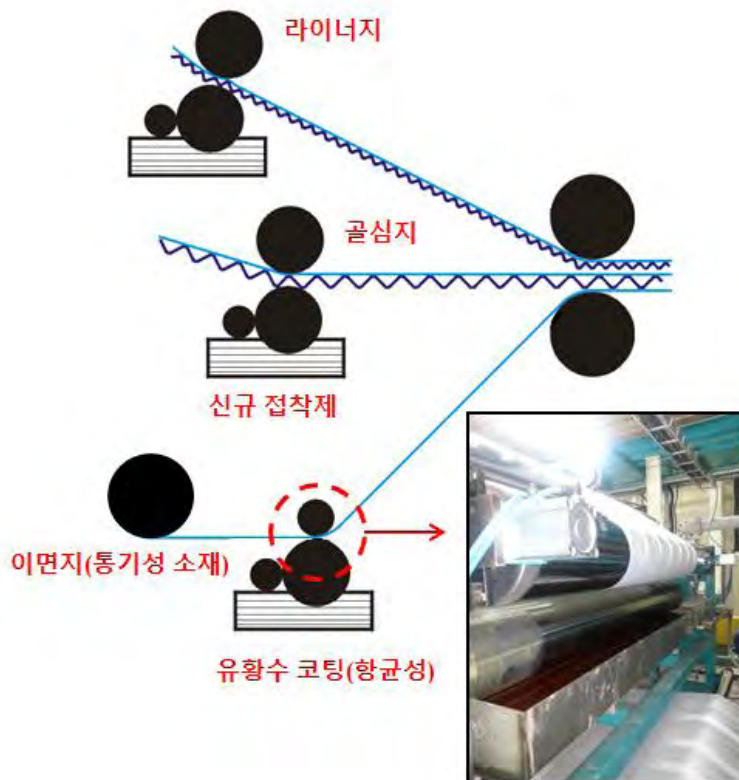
Manufacturing process of hybrid corrugated board prototypes.
